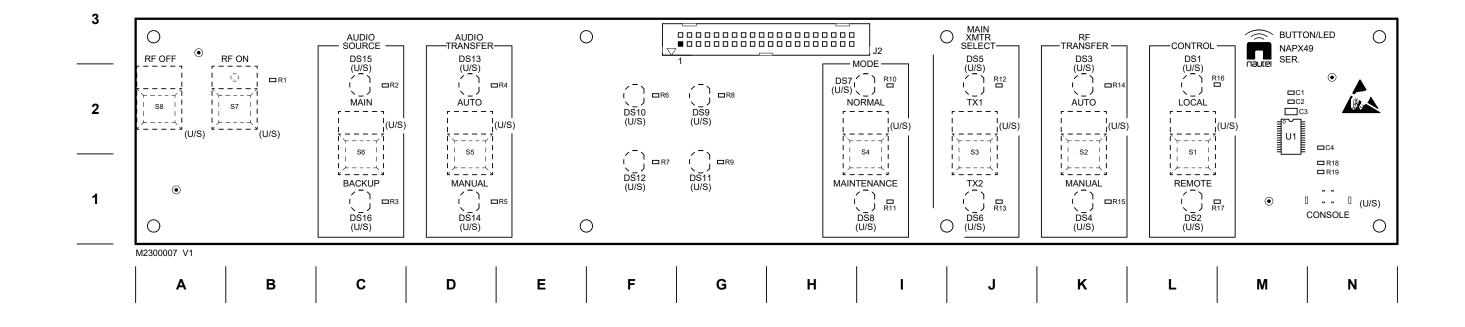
Assembly Detail - NAPC166B/01 Transfer Control PWB
